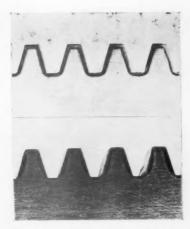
Sections through worm threads showing hardened case pattern produced by carburising (above) and surface hardening (below).
